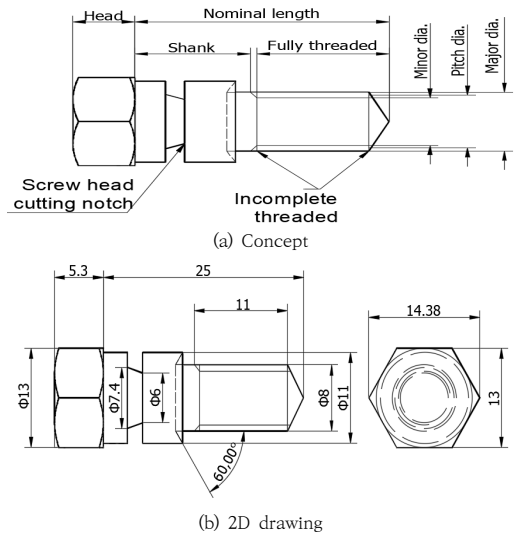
Concept and 2D drawing of crack repair screw
